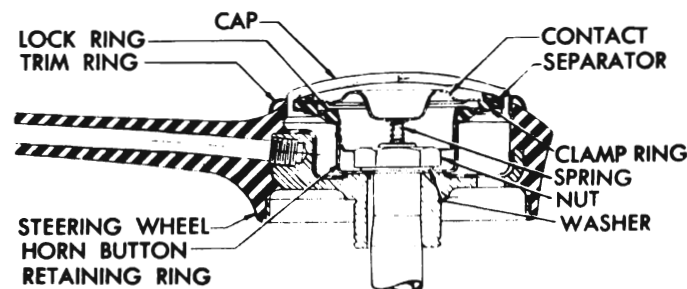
Horn Button in Solid Spoke Steering Wheel—
